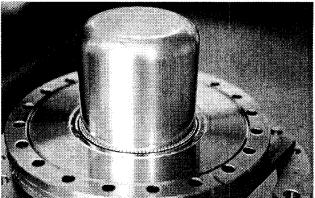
Tuner Assembly showing Plunger and Mounting Flange with Spring Fingers.
